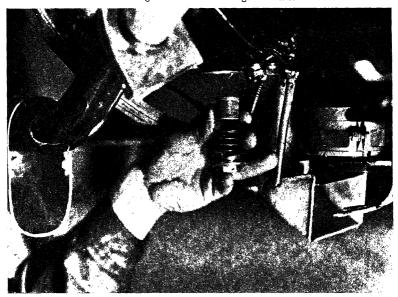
CLEAN FUEL FILTERS (2). Removing fuel filter in body of carburetter.
